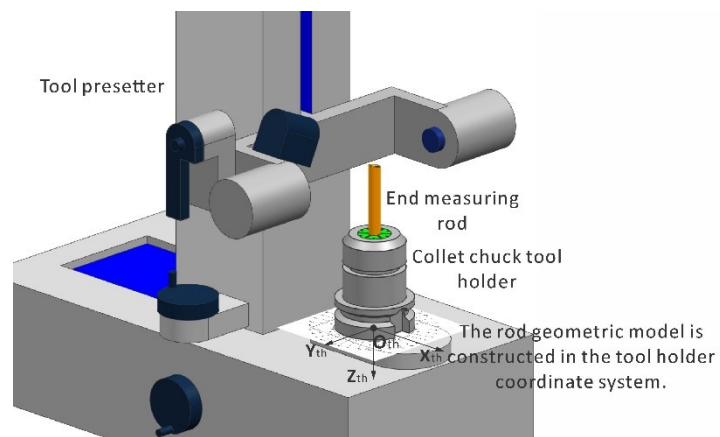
The end measuring rod clamped in the collet chuck tool holder is measured on the offline tool presetter in the tool-holder coordinate system.
